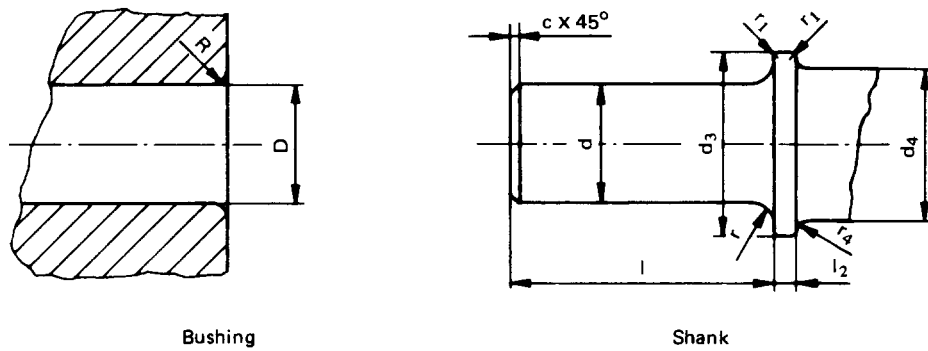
Light rivet snap shanks and chuck-bushings, parallel
